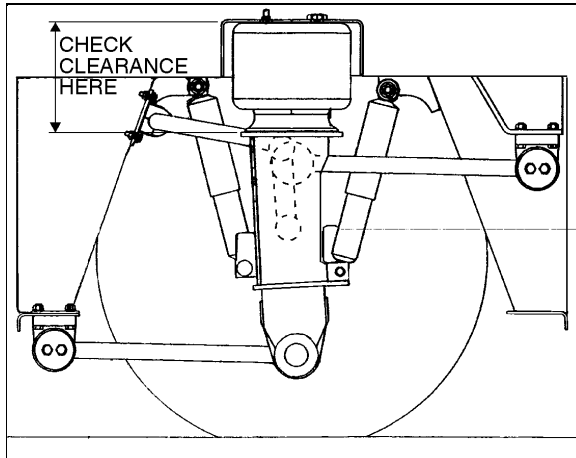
TYPICAL AIR SPRING CLEARANCE 16002
